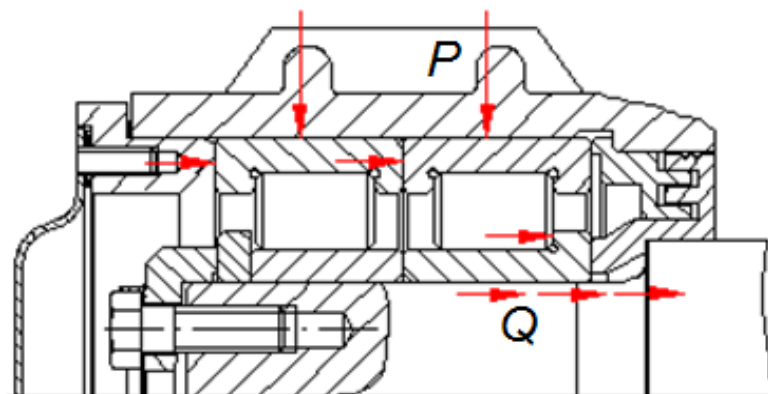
Scheme of load transfer in the axle assembly under the action of axial force in the direction of the flange of the axle neck
